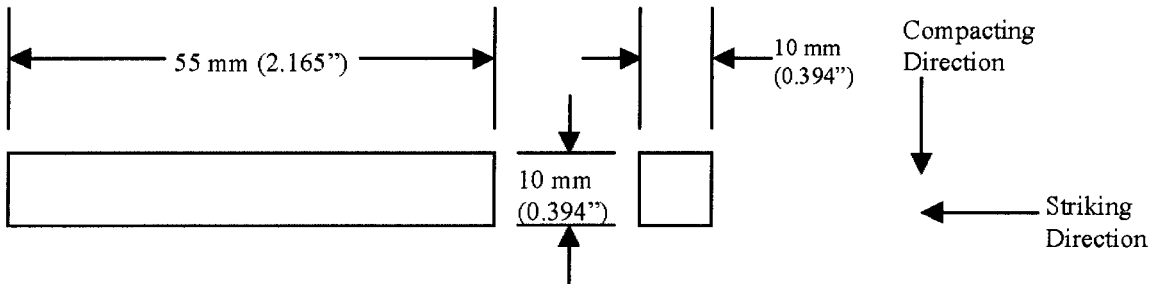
Izod (Cantilever-Beam) Impact Test Specimen, Type D
